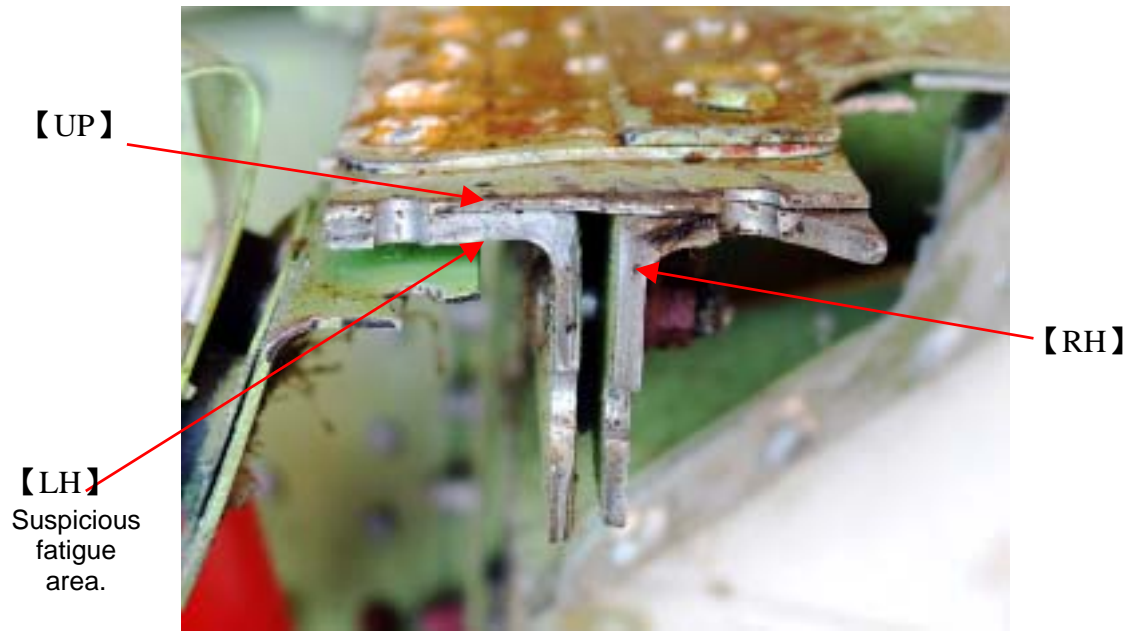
Macro fractographic examination of upper door reveal.(1.5X)
